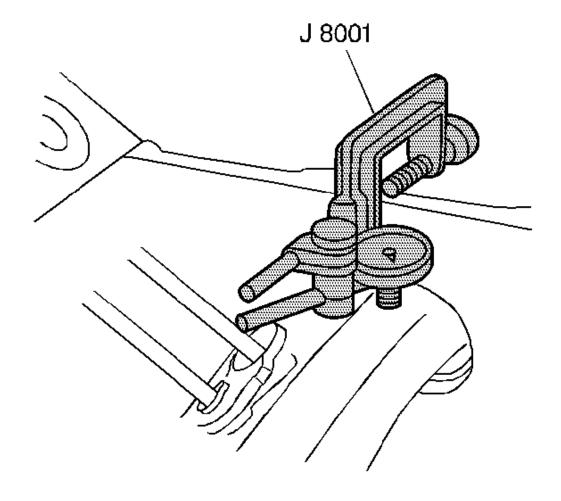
Measuring Balance Shaft Radial Play Courtesy of GENERAL MOTORS CORP.
